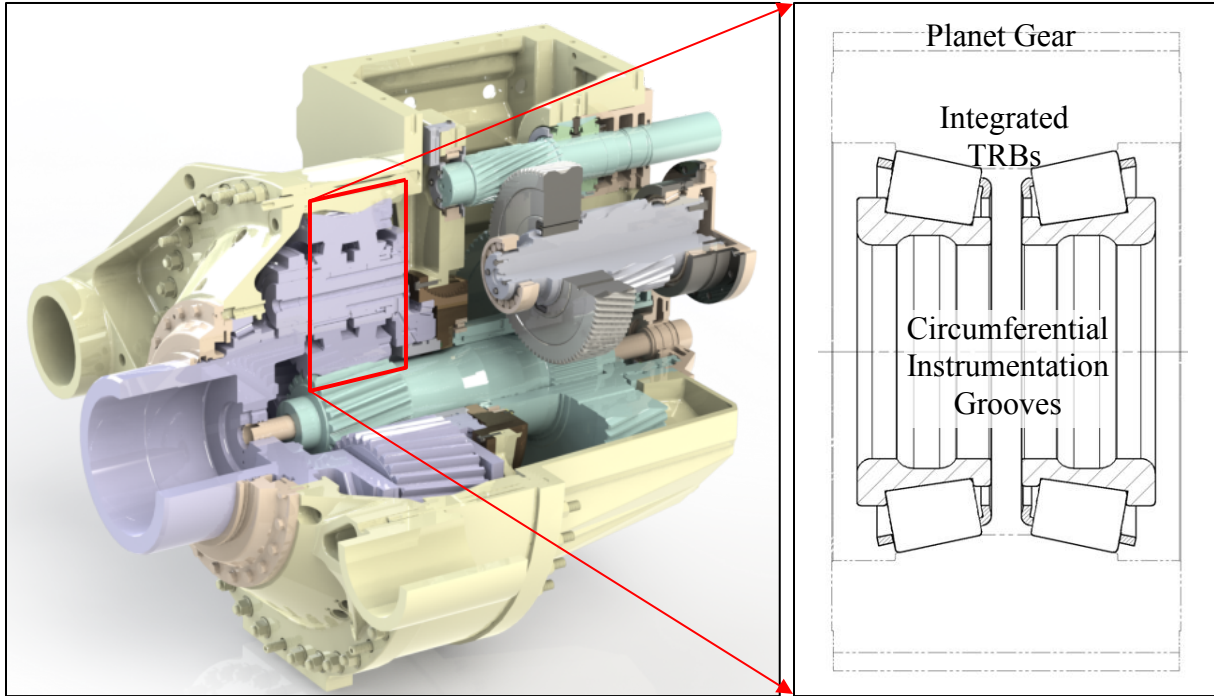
Gearbox 3 planet bearings. Illustrations by Romax Technology (left) and Timken (right)
